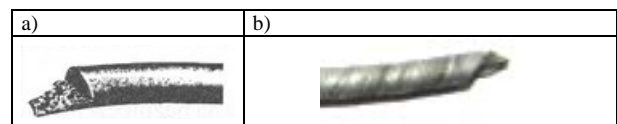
Wires of bearing rope broken due to: a) bend test; b) torsion test.
